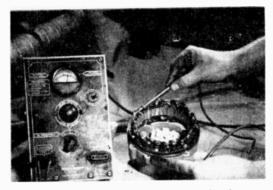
Check for a grounded condition in the alternator shell by touching stator winding assembly and case.
